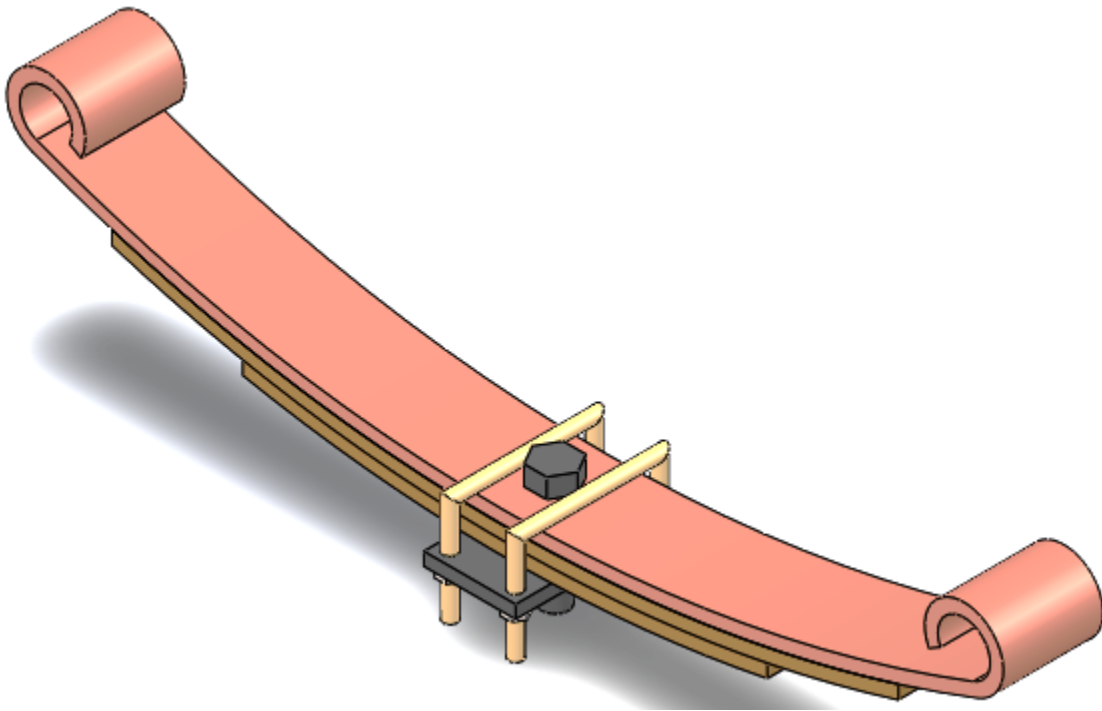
SolidWorks model Assembly view of conventional steel leaf spring
